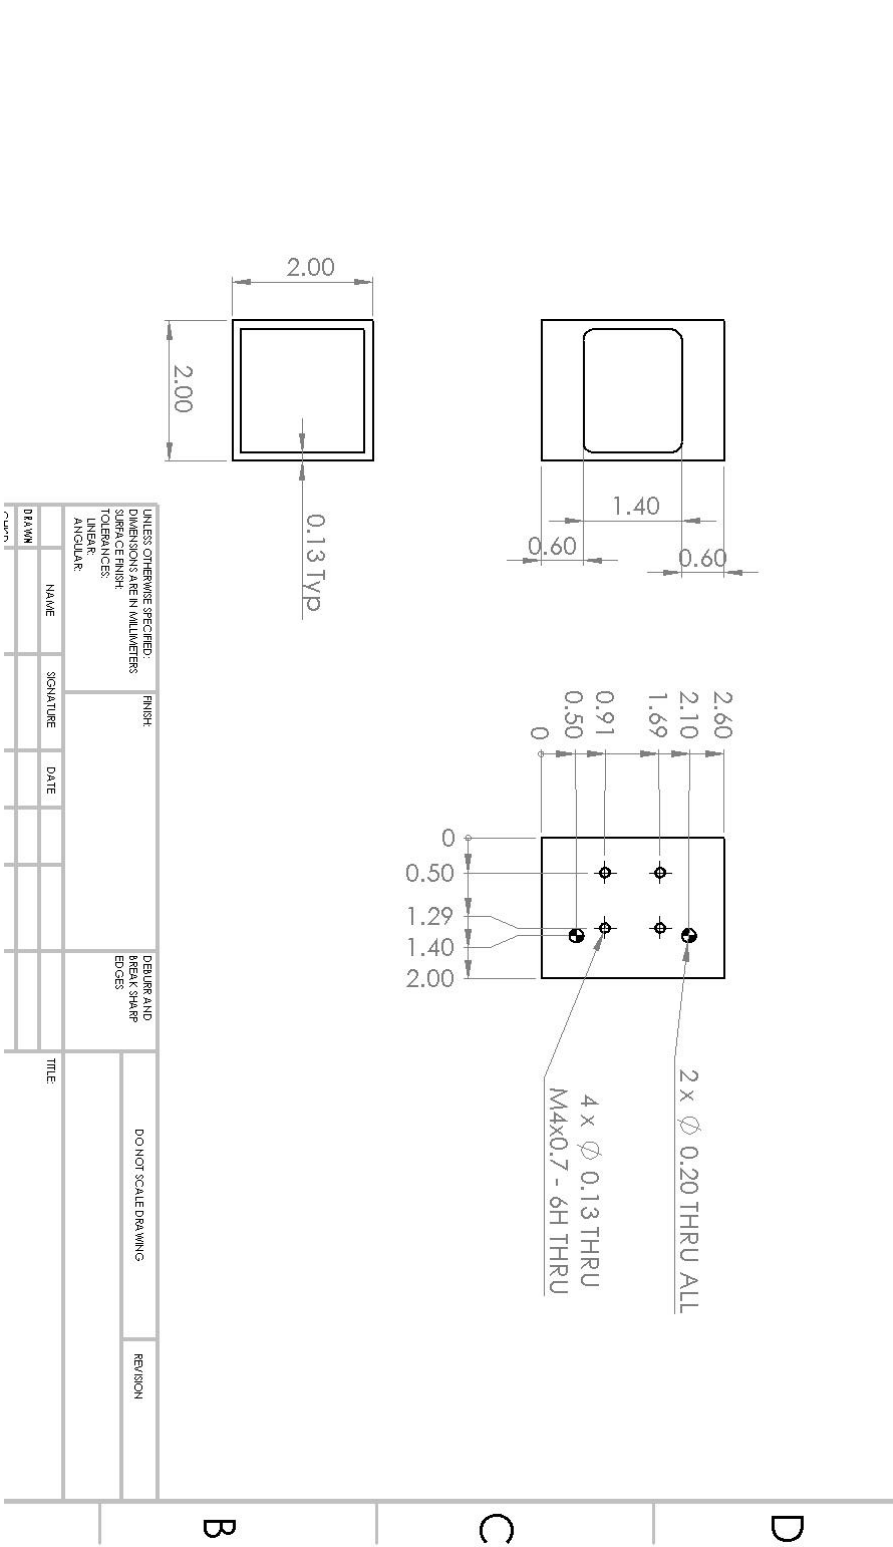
Drawing for 2x2 Gantry Pulley Mount
